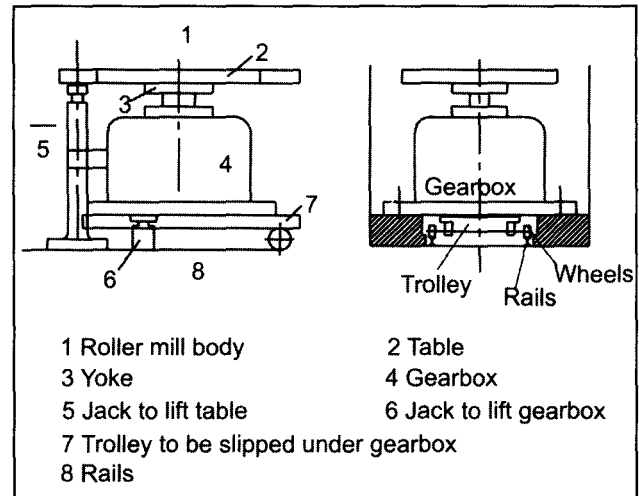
Taking gearbox out from under vertical roller mill.
